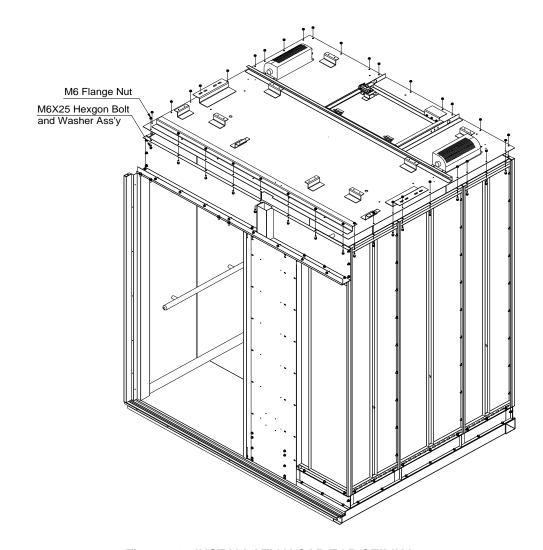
INSTALLATION CAR TOP CEILING
